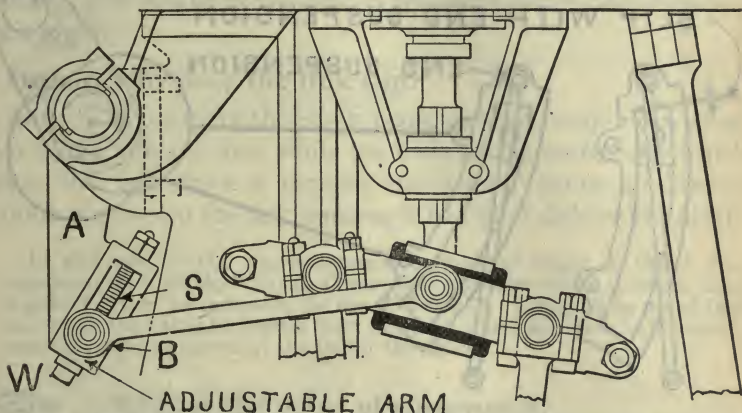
Independent cut off adjustment for link motion; view showing gear assembled on engine. The reach rods are pivoted to a block which works on the screw S. By turning this screw at W, the block is moved in the slot and the link shifted, thus changing the cut off.
